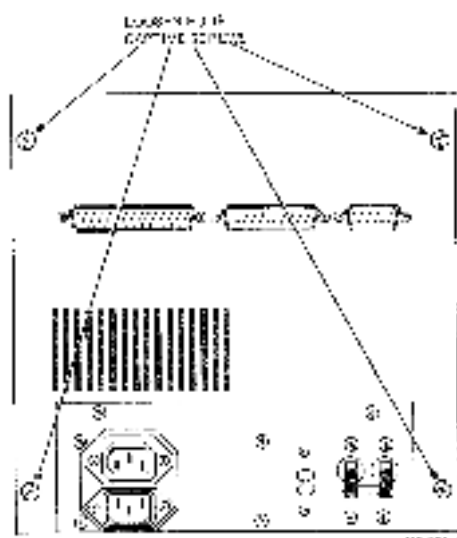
Removing the Tabletop Cover/Bezel Assembly
